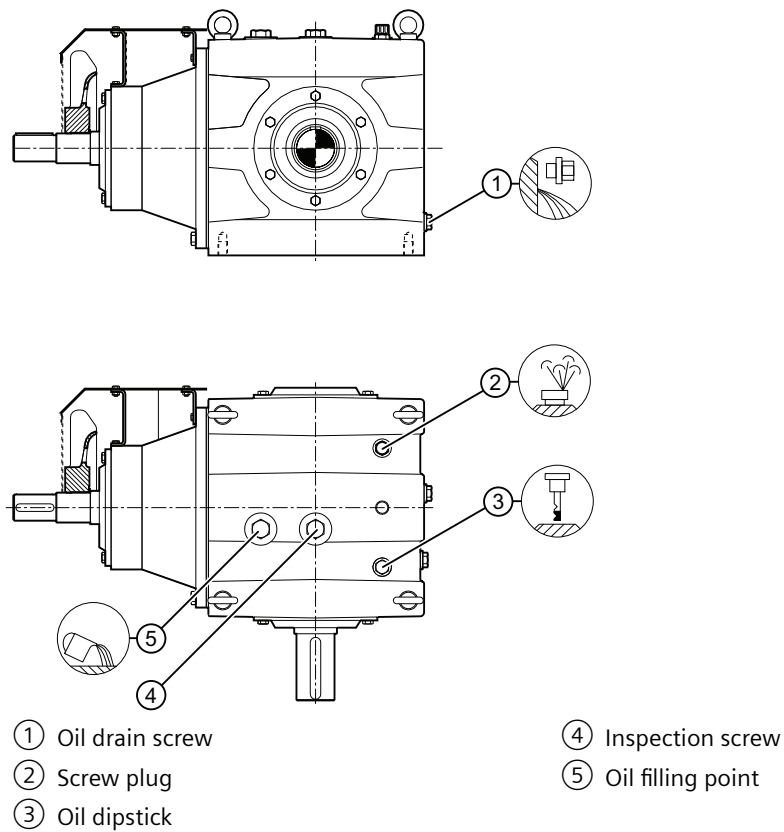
Oil filling locations and oil drain locations for type K.N gear units
